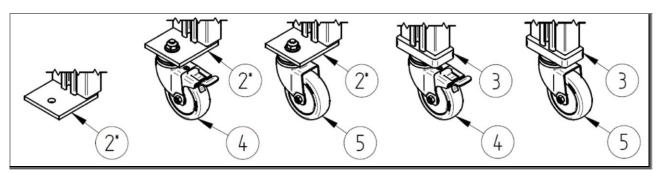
Parts list: Conveyor support, components ZZ.982.0106.00
